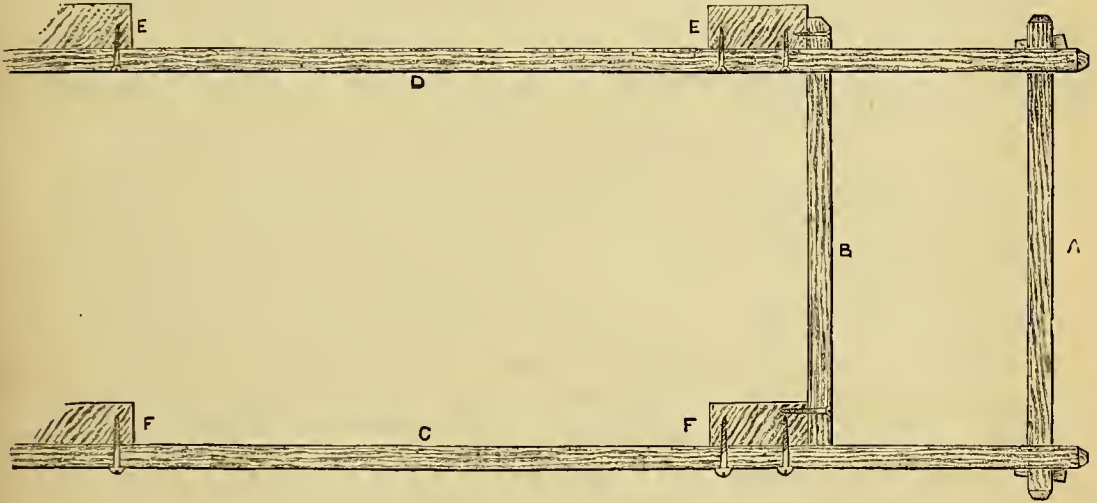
HORIZONTAL SECTION THREE INCHES BELOW TOP OF TABLE.
